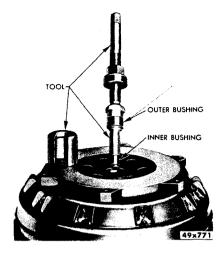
Bushings Positioned on Tool for Installation Tool (C-708)
